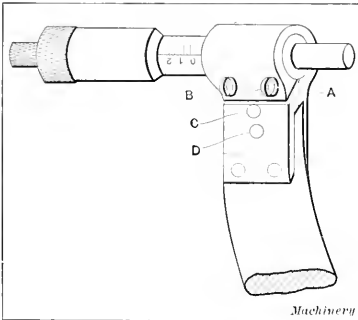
Arrangement of the Clamp for holding the Micrometer Head
